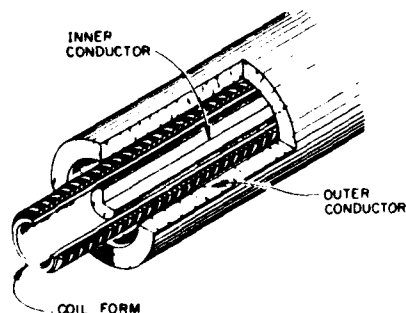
Cutaway drawing of solenoidal coil coaxial with inner and outer conductors.
